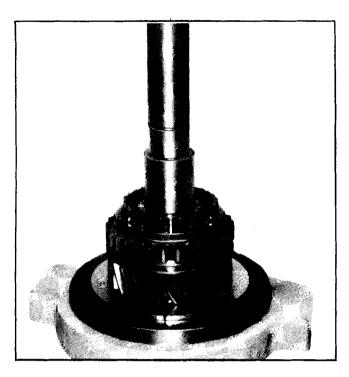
C-17 Removing 1st and 2nd Synchronizer and 2nd Speed Gear
